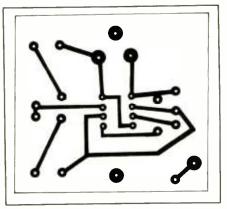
Actual-size etching-and-drilling guide for fabricating a printedcircuit board for the project.
